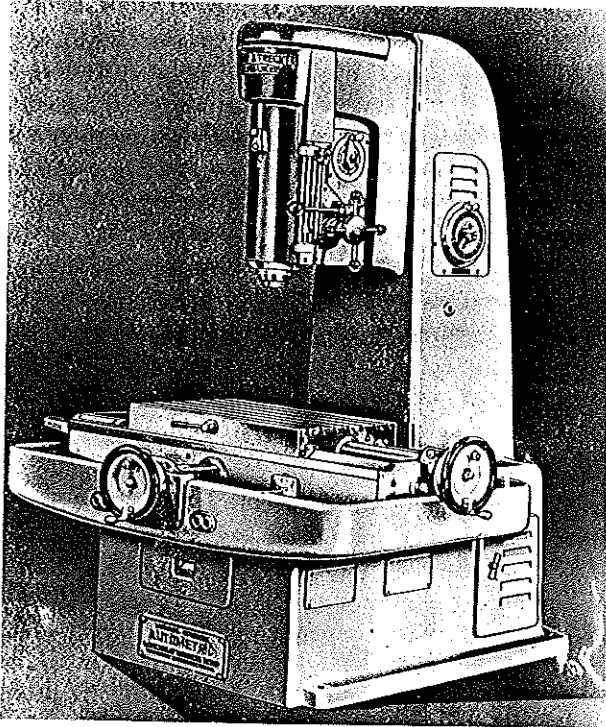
Precision boring machine. Courtesy Kearney and Trecker.
